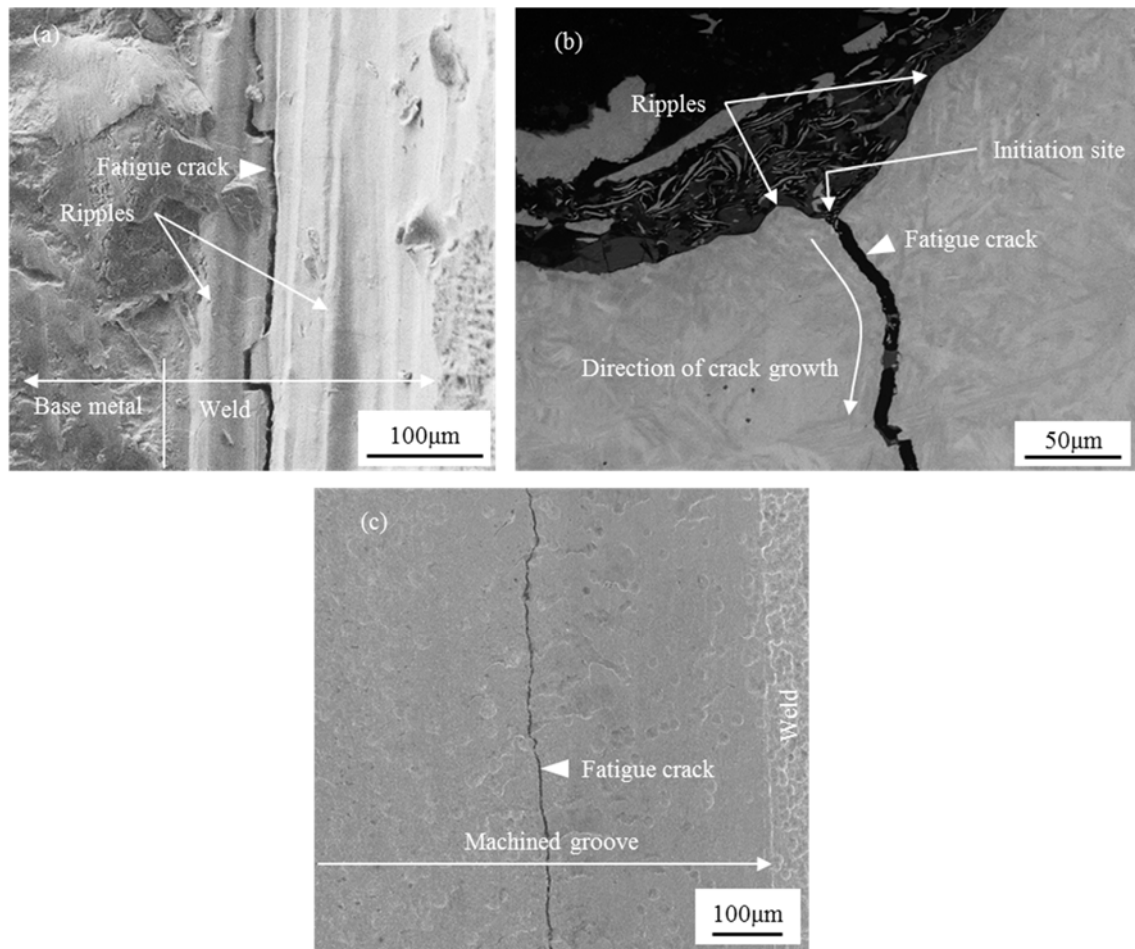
Fatigue cracks of 980B welded joint specimens after fatigue testing. (a) Appearance at the specimen surface of the as-welded joint, (b) the cross-section of the as-welded joint, (c) appearance at the specimen surface of the toe machined welded joint with toe radius of 1.5mm.
